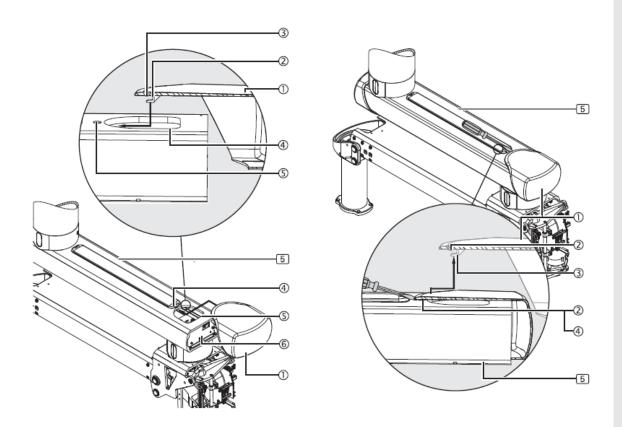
Assembly (left) / disassembly (right) of protective caps on an extension arm
